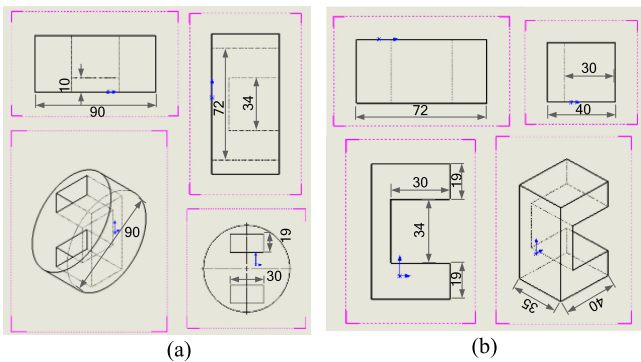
Mold for the magnetic material and material size. (a) Nanocomposite mold. (b) Shape and size of the material body.
